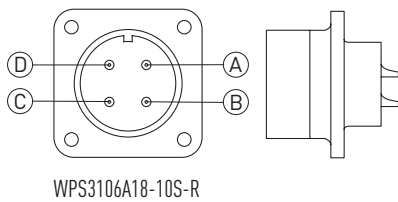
Assignment of motor connector, 1,000 W and above
